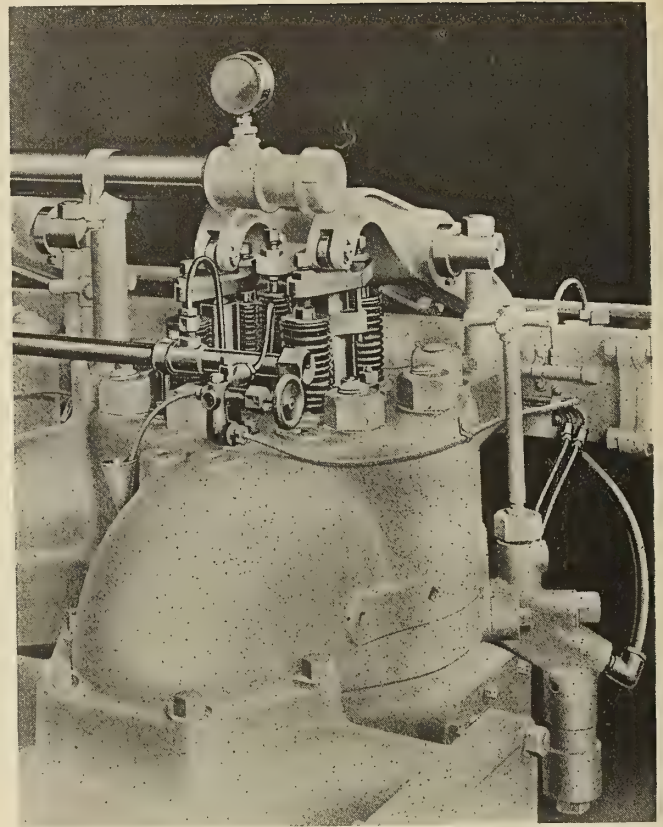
Completely Assembled Cylinder Head, Showing Valve Operating Mechanism and Fuel Injection Pipes
